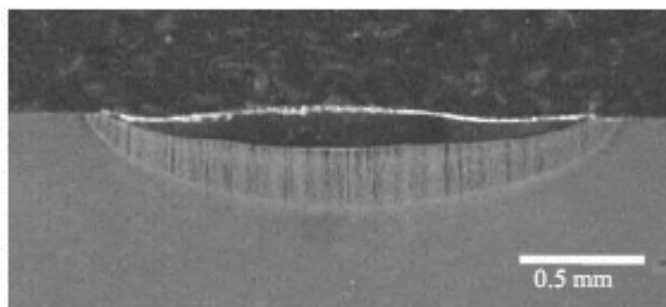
Surface layer of 32CrMoV12-28 steel after laser alloying with tungsten carbide, laser power of 2.0 kW
